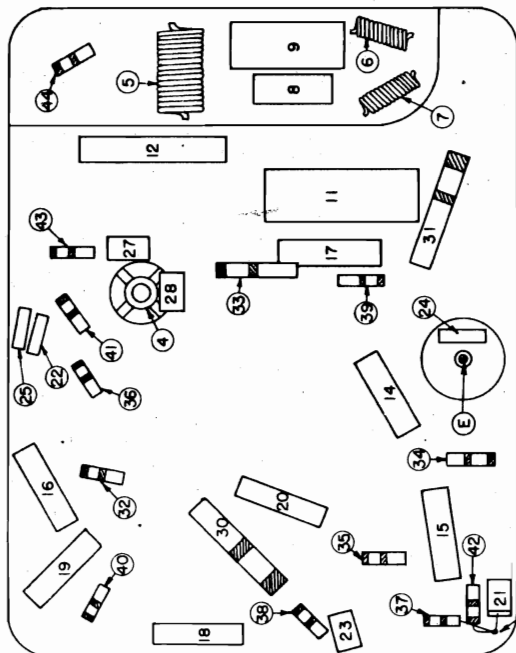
PARTS LAYOUT--DASH UNIT--Bottom View
